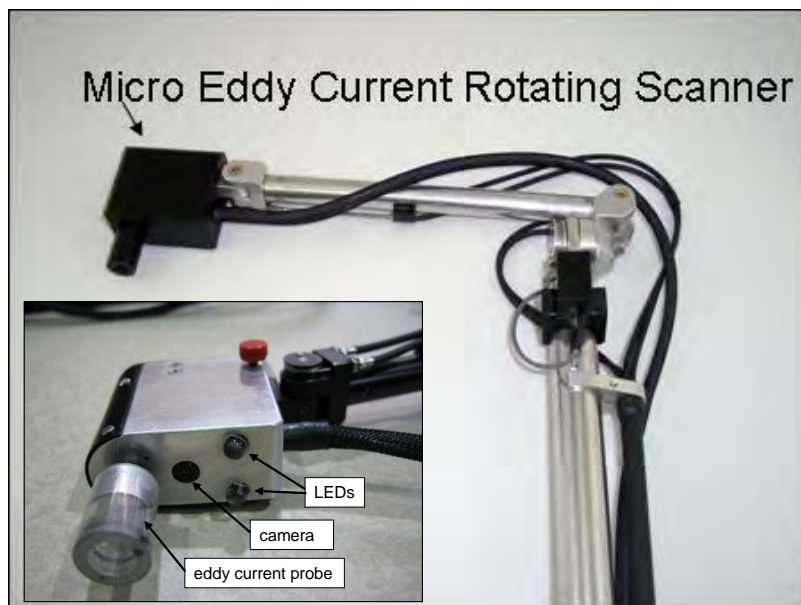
The micro eddy current rotating scanner on the end of the SuNDE Tool is designed to inspect for cracks around fasteners. The inset is a close-up view of the micro eddy current rotating scanner.
